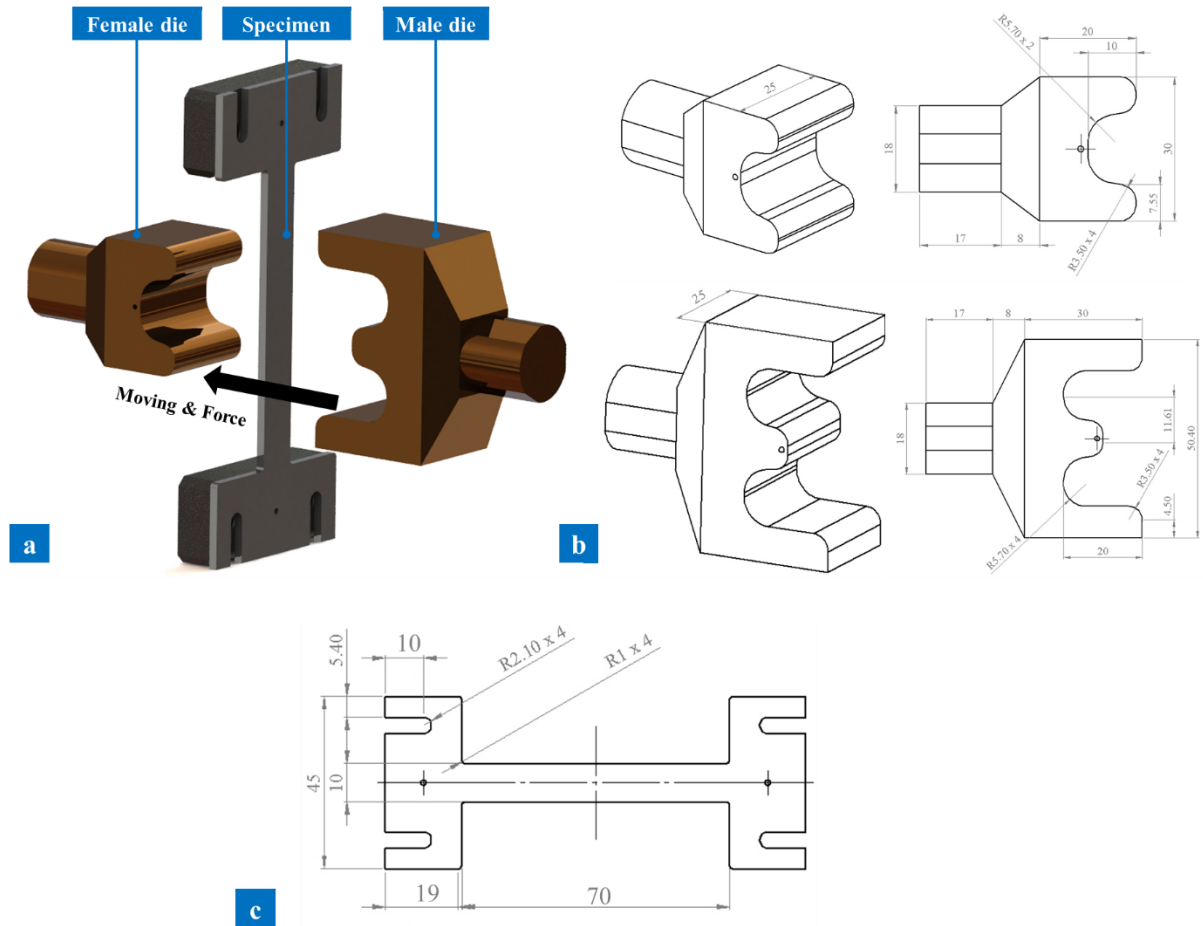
(a) Structures of the M-shaped forming tools and specimen in IHTC-Mate 3.0; (b) Geometries of the forming tools; and (c) Geometries of the specimen.
